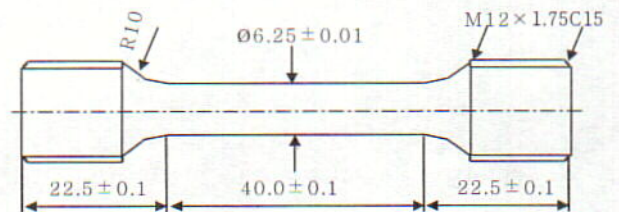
Dimension and shape of tensile specimen (Standard ASTM E 8)
